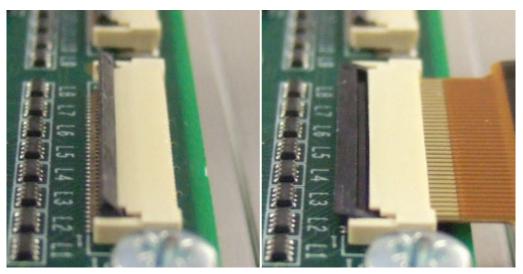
ZIF CONNECTOR LOCKING BAR IN UNLOCKED AND LOCKED POSITIONS
